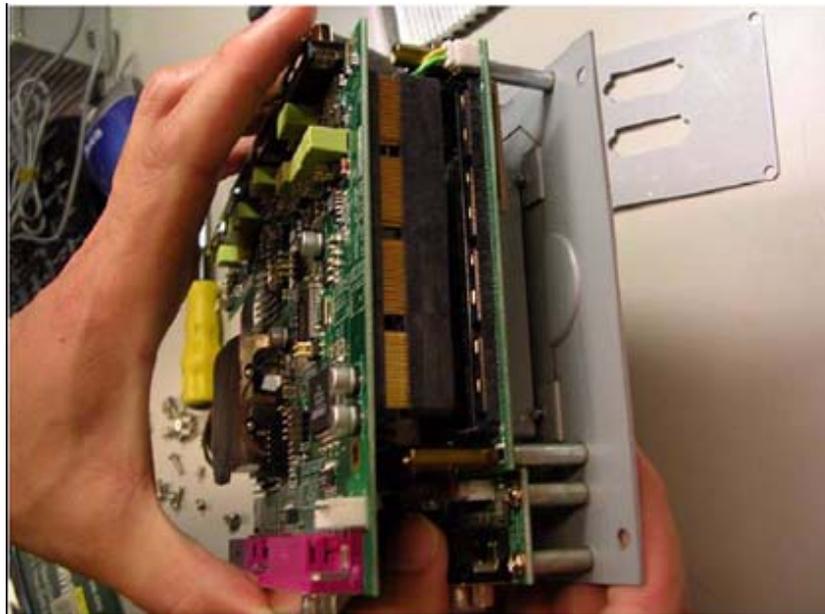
Remove AMO-3000 from MIO socket of the system board
